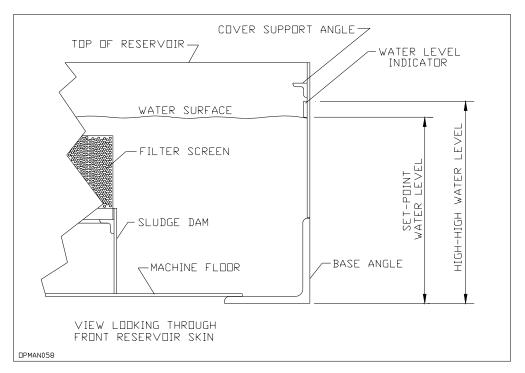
18: Water-Level Set-Point Dimensions and Measurement Location
